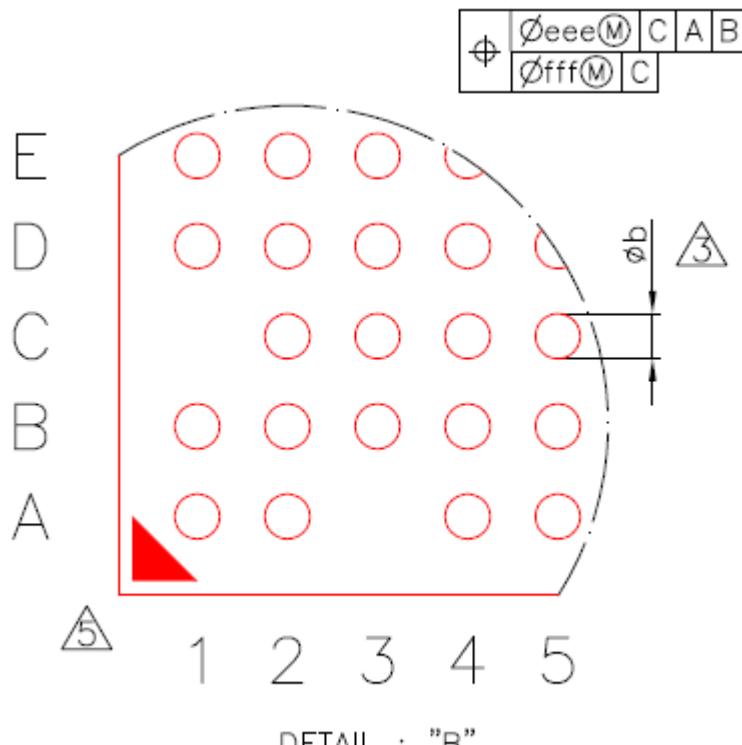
PX5 TFBGA453 Package Bottom View
